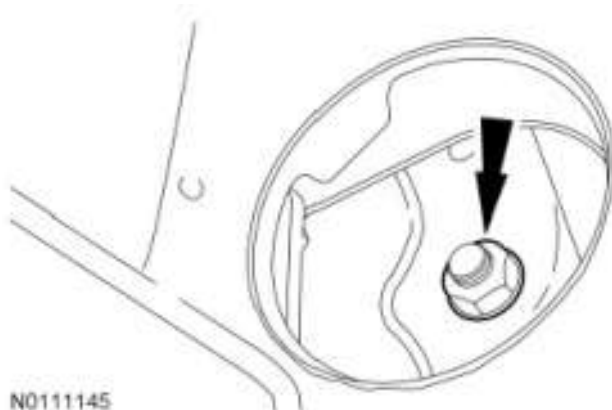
Locating Torque Converter-To-Flexplate Nut
